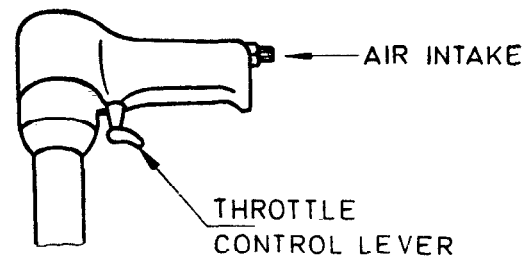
PISTOL GRIP HANDLE WITH THROTTLE TRIGGER CONTROL, TYPE D
